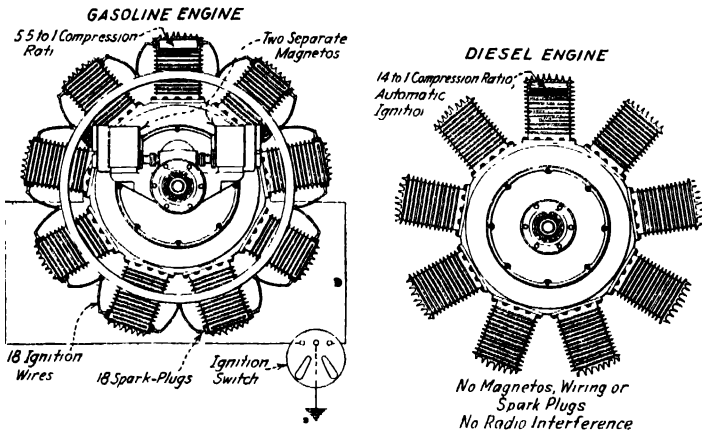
A.—Diagrams Showing Elimination of all Wiring on Compression Ignition Engine.
